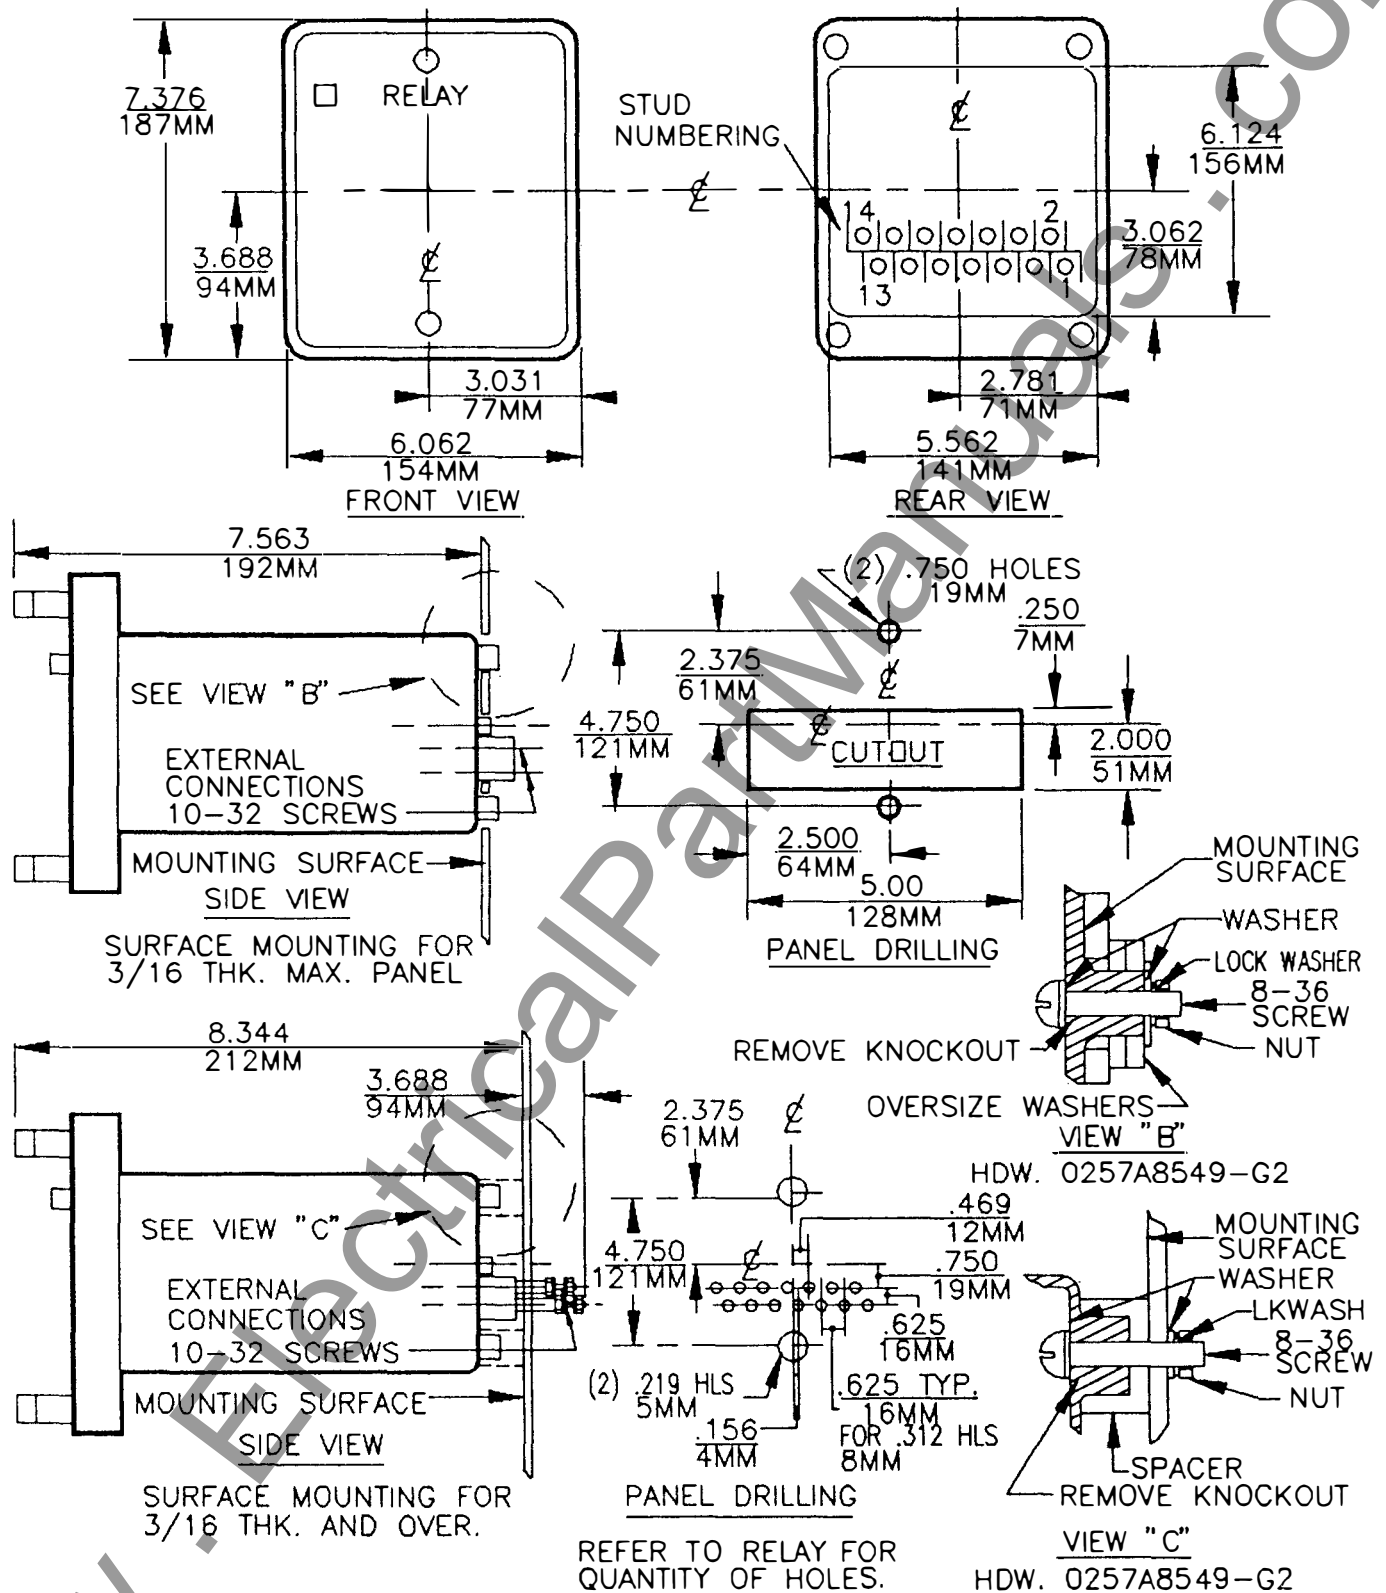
(0257A8452-3 Sh.2 [5]) Outline and Panel Drilling for Surface Mounting of Relay Type IFCV51
